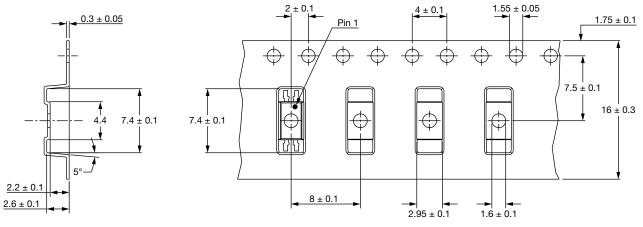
Tape and Reel Packing (3000 parts per reel)
